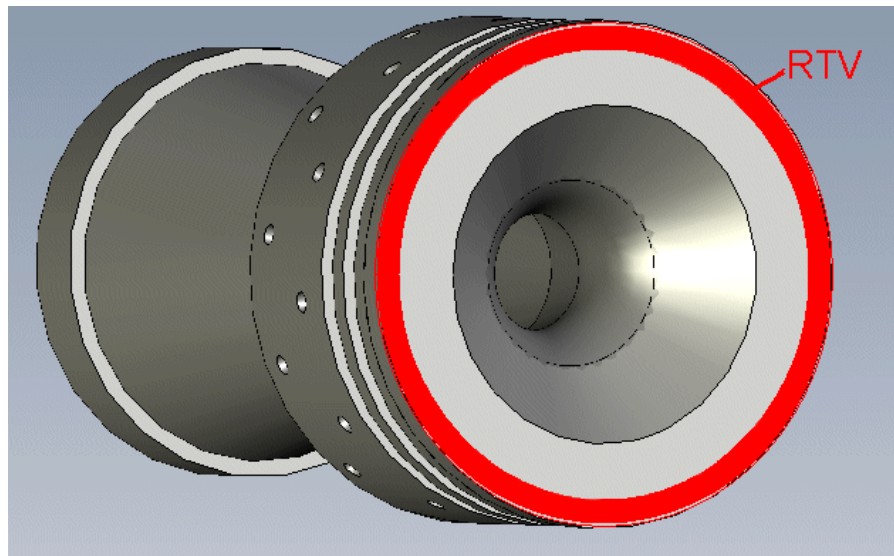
RTV sealant application zone (red) on Nozzle Assembly
